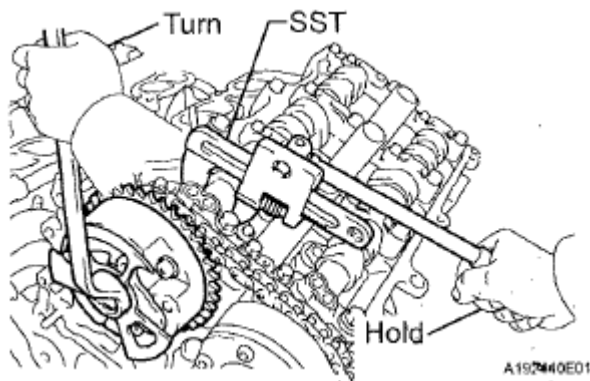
Loosening Flange Bolts Of Camshaft Timing Gear Assembly
